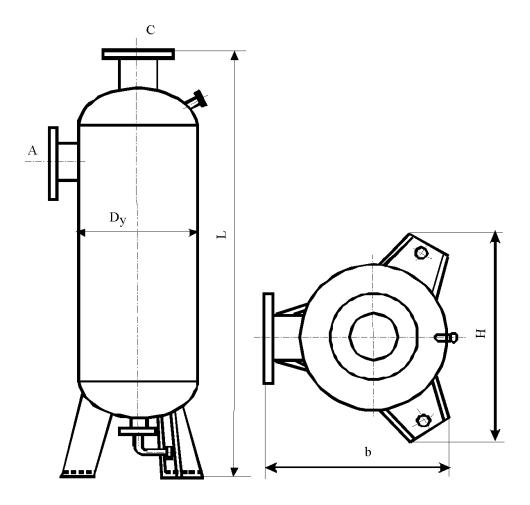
Scheme for construction of welded oil separator, manufactured by "Snezhnyansk khimmash"
